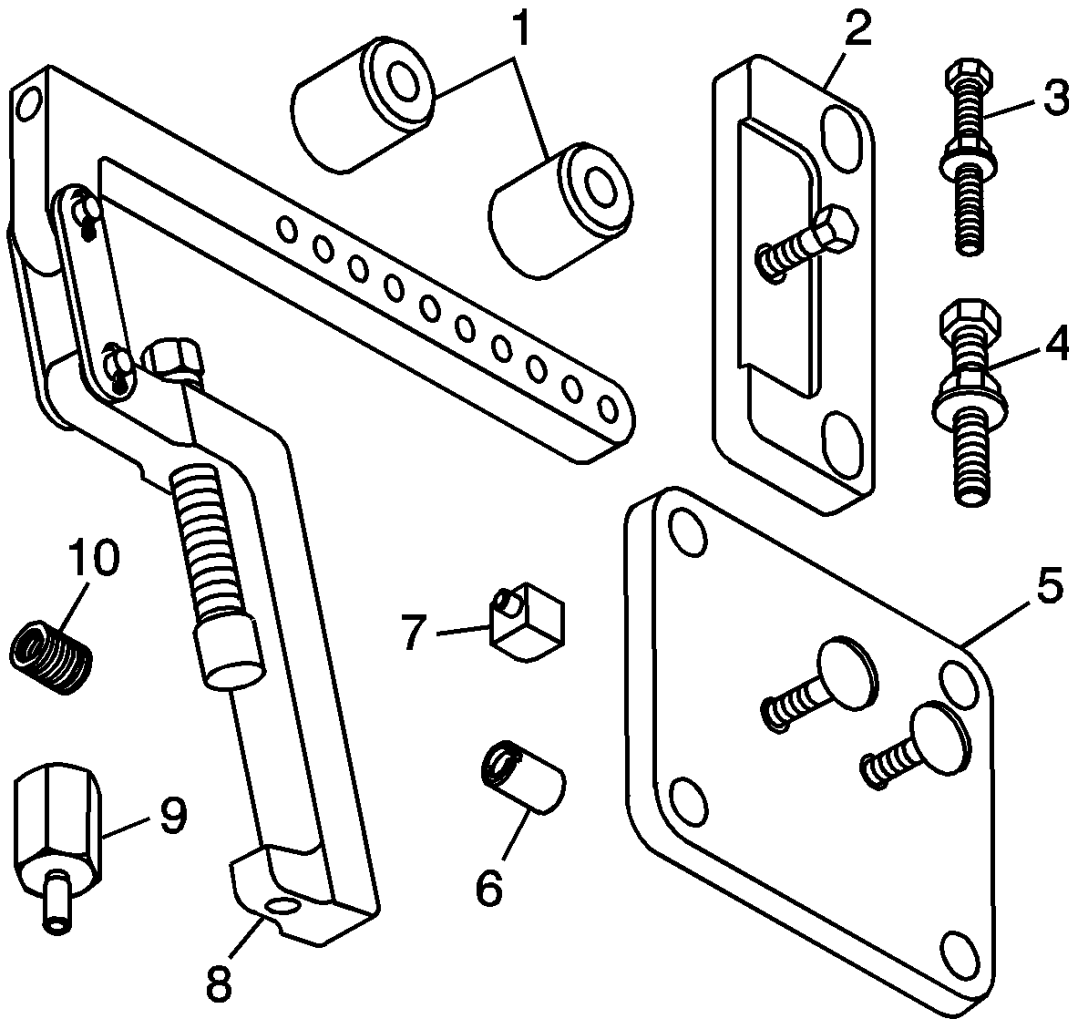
Identifying Rod Bearing Clearance Tool - Adapter Kit
